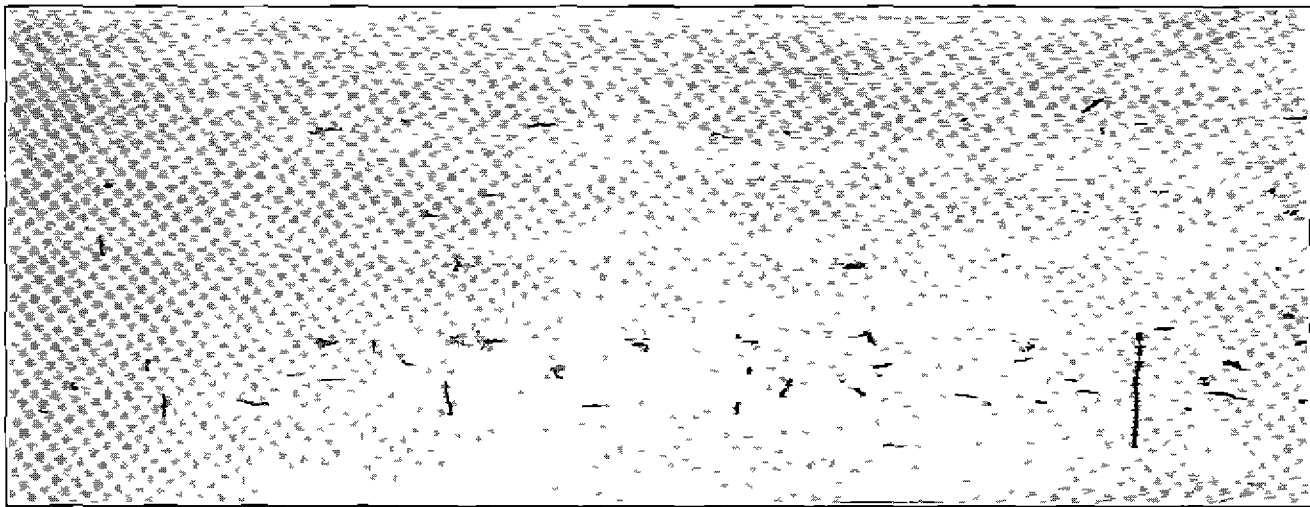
Head of rail 17054F, planed off $\frac{5}{16}$ inch and surface pickled. Incipient transverse fissures and shattering cracks located on gauge side of the head
